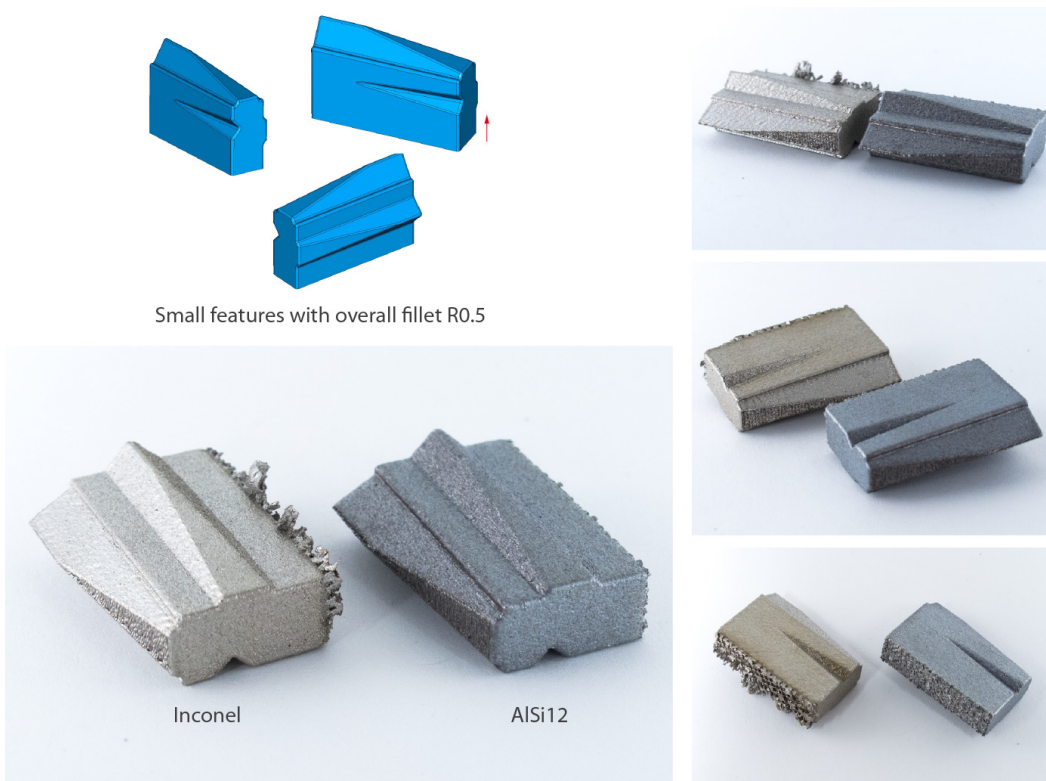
Remarks on the small detail –test pieces. The small details print fine. The AISi12 shows slight burr at sharp edges, and less burr at edges with fillets.
